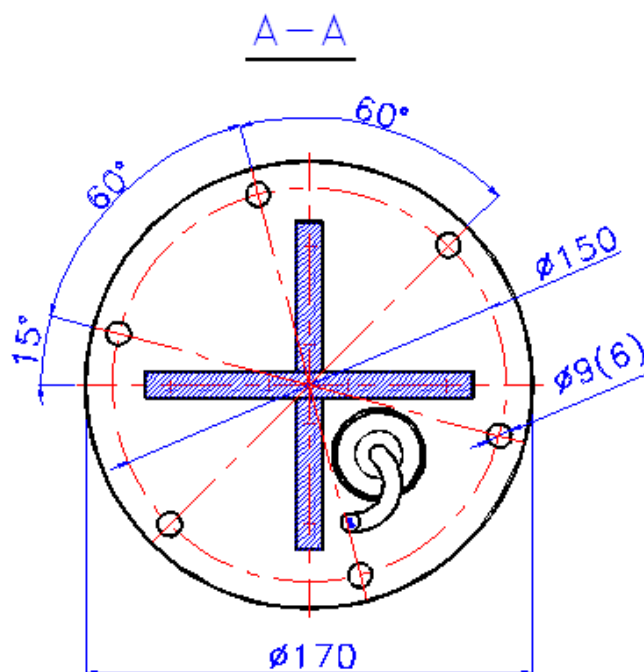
LED Buoy Lantern E8233 bottom view of the mounting flange
